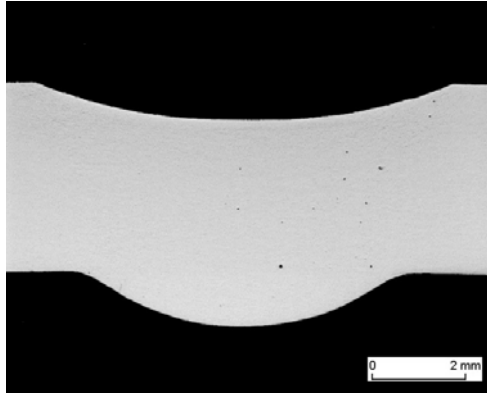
Unetched weld cross sections of 6060-T6 coupon made with He+Ar+H₂ and 0% 4043 filler dilution revealing interdendritic pores.
